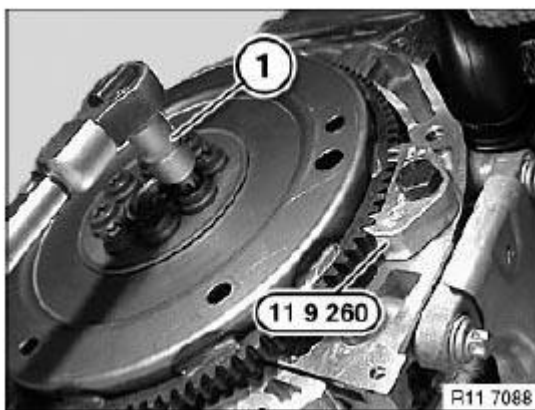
Releasing Flywheel Bolts Using Tool (11 9 260)
